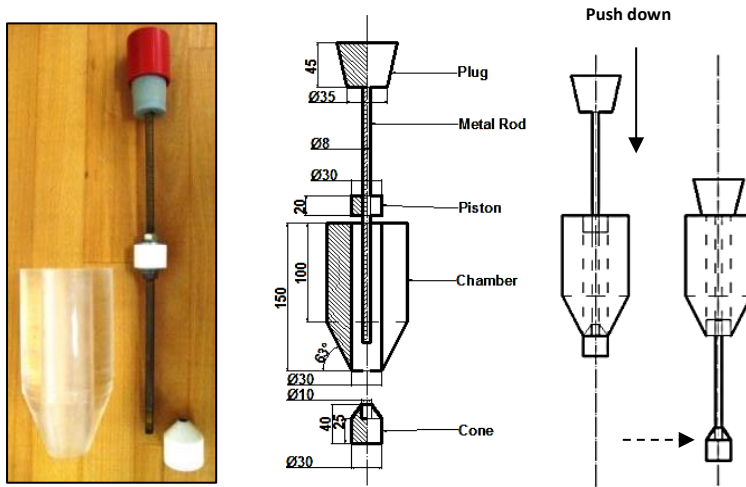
The injection device used in the Basel University settling tube apparatus. Measurement units in mm.
